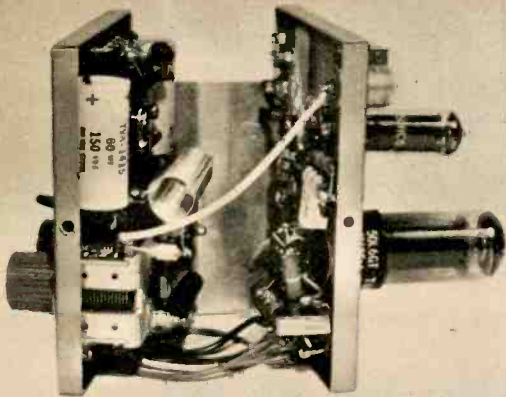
Photo shows how mounting plate shown in Fig. 4 supports front and rear panels to permit transmitter to be operated out of the cabinet.
